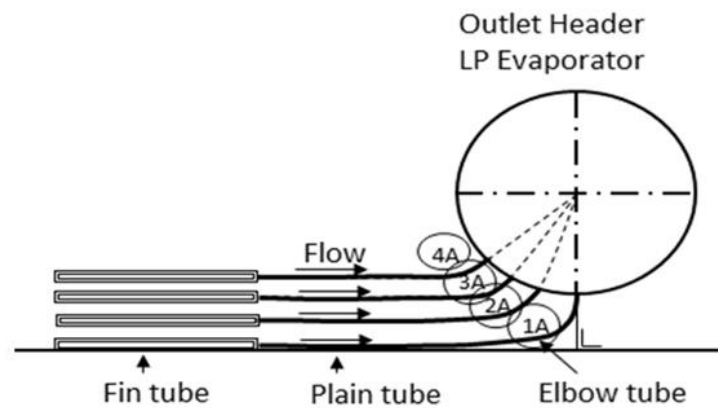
The elbow tube's connection angle with the low pressure evaporator evaporator outlet header, i.e 90° (elbow tube 1A), 75°(elbow tube 2A), 60° (elbow tube 3A), and 45° (elbow tube 4A)
